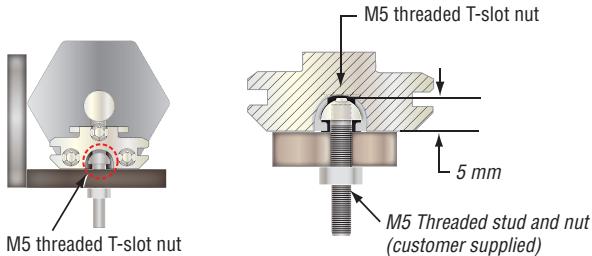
T-slot nut (M5 threaded), Nut for mounting model RP and GP sensors.
